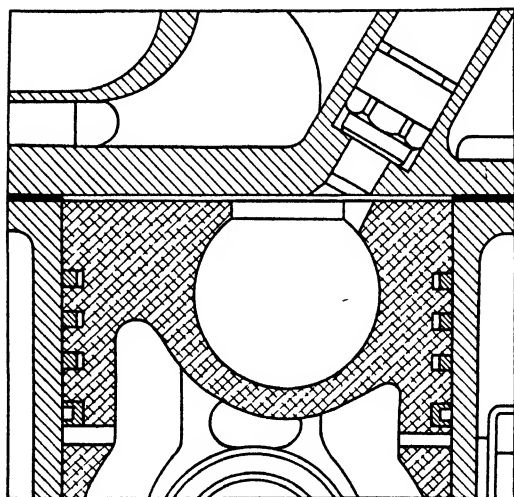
SPHERICAL COMBUSTION CHAMBER OF M.A.N. ENGINE.
